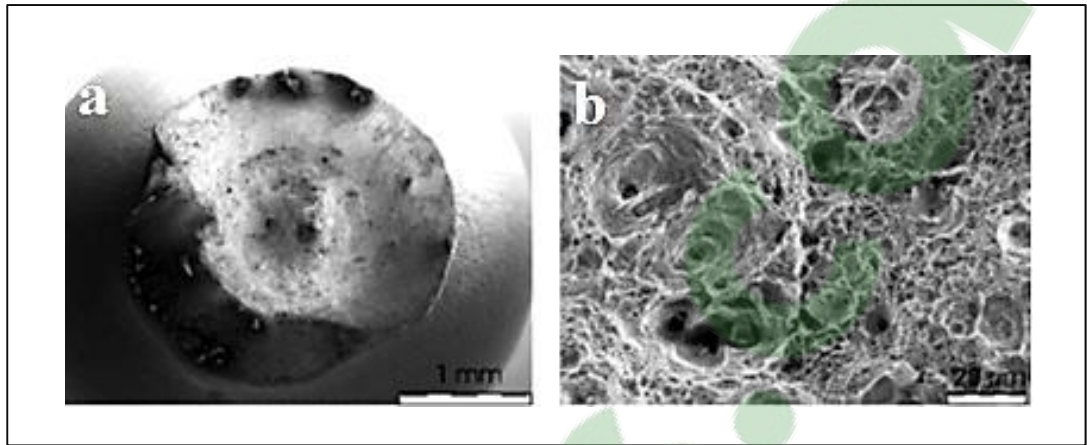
Fracture surface appearance of EB welded SMSS tested in air: (a) an overview of the fracture (showing the cup and cone fracture) and (b) fracture surface showing dimples (Srinivasan et al., 2004)
